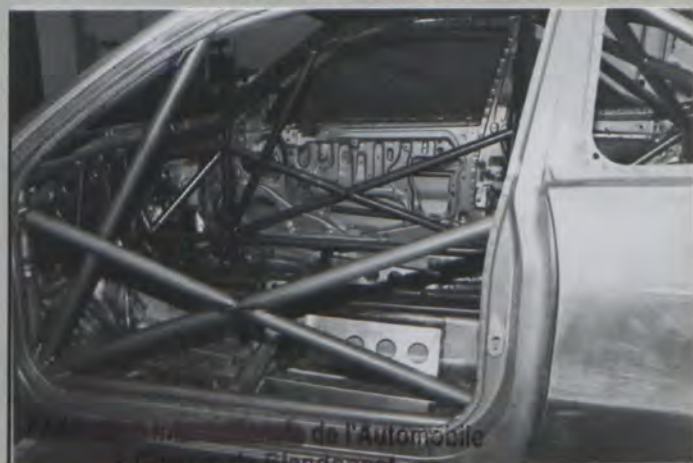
FRONT LATERAL TO ROOF (LEFT)
